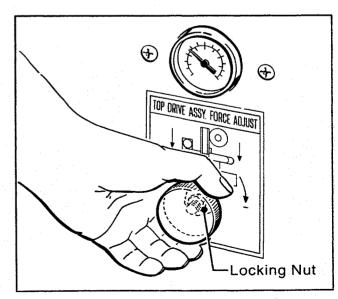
Pneumatic Upper Drive Assembly Regulator
